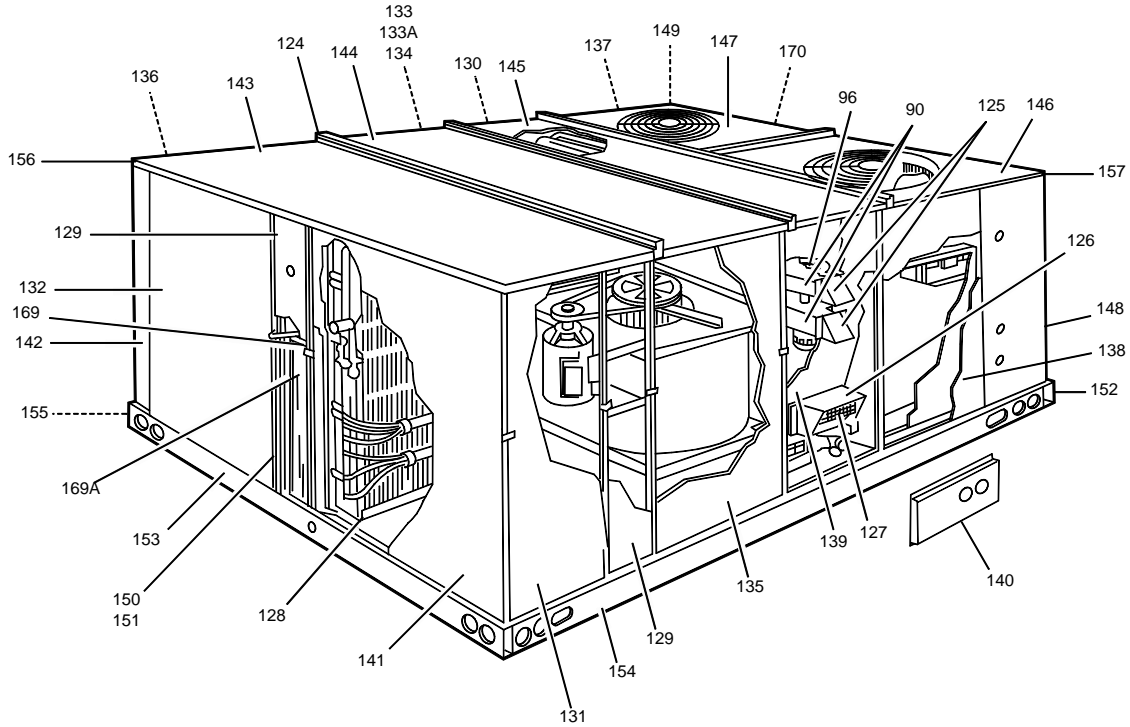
SINGLE PACKAGE GAS/ELECTRIC UNIT
